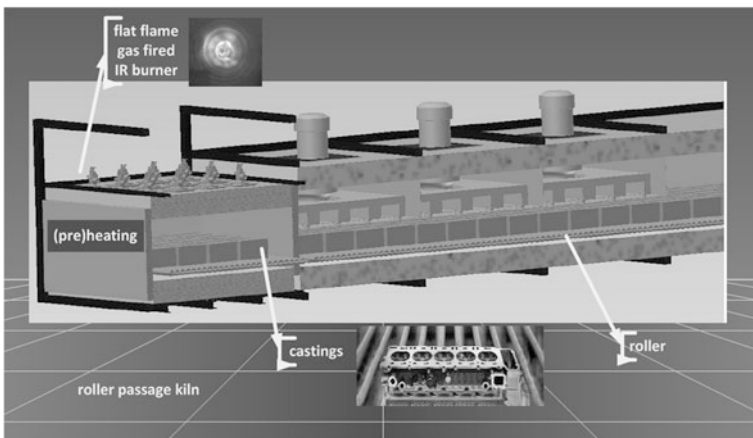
Roller passage kiln with flat flame gas fired infra red burners—concept BELTE—LOI; Pre-heating and solution heat treatment zones
